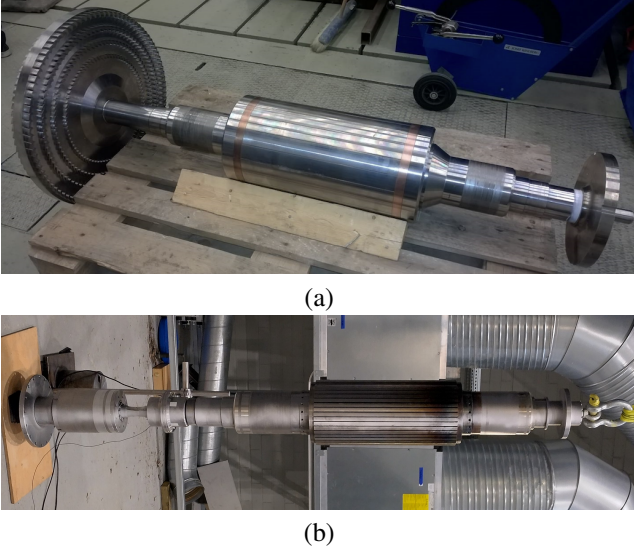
(a) Rotor of 1 MW integrated high-speed steam generator. (b) 1.2 MW electric machine rotor coupled with the extension shaft and dummy impeller.
